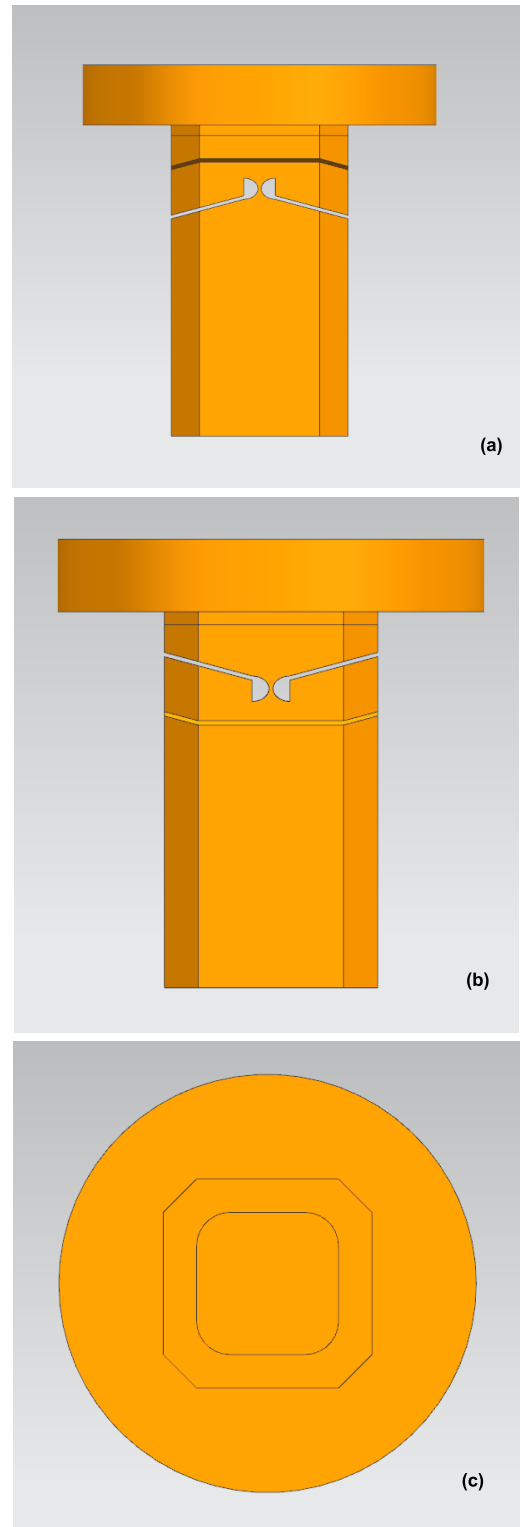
(a) Front view; (b) Right view; (c) Bottom view.
